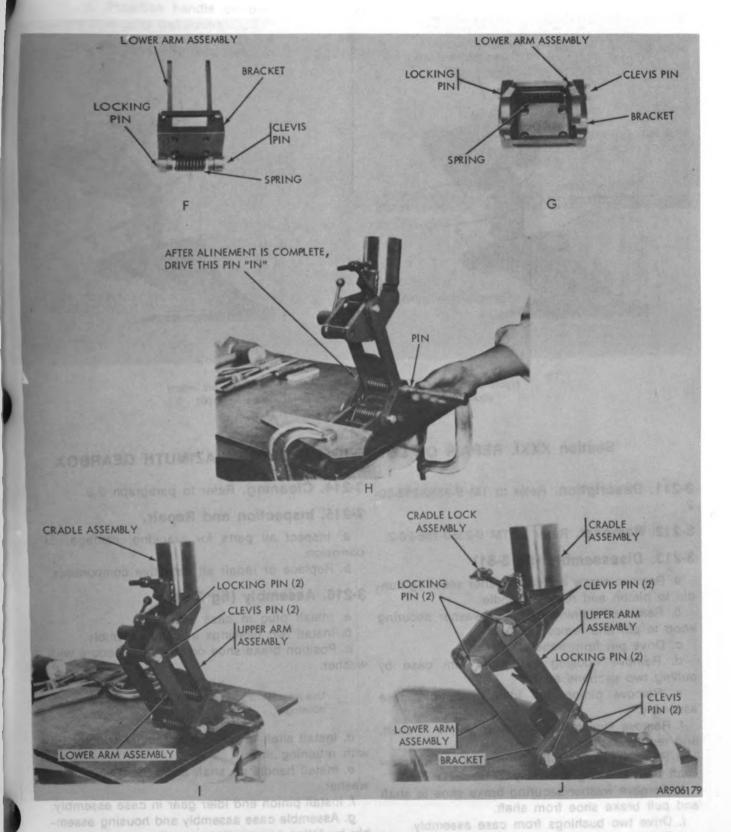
Low-profile cupola 7.62-mm machinegun scissors mount disassembly or assembly (vehicles serial numbered A1001 thru A1999 and A3375 thru A3999) (2 of 3).
